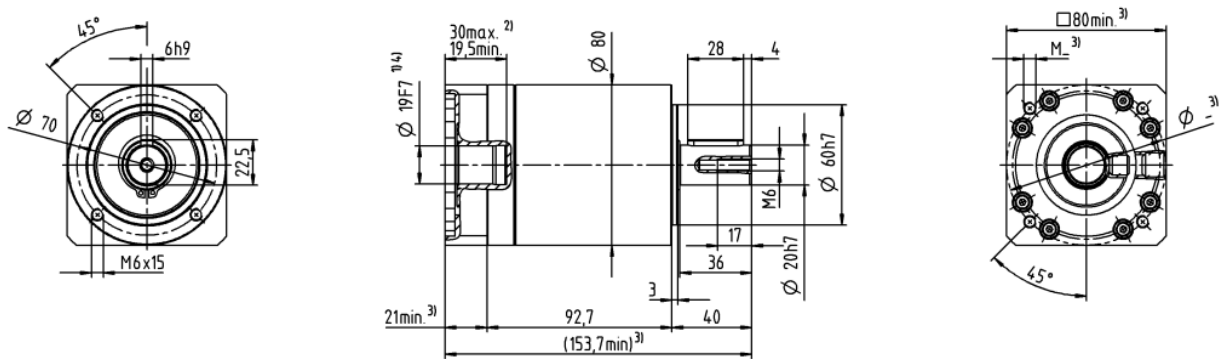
CAD drawings of the CP 025 MF gear train ^[8]
